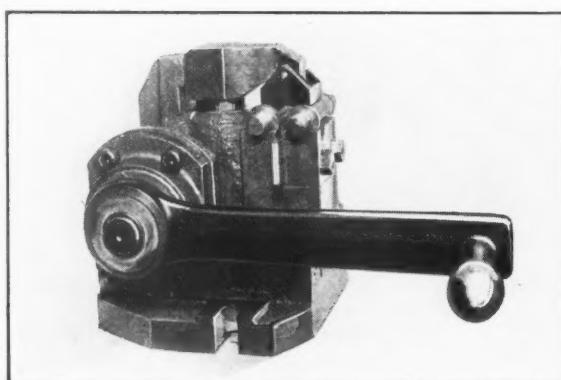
Swartz Clamping Lock Applied to a Milling Fixture
